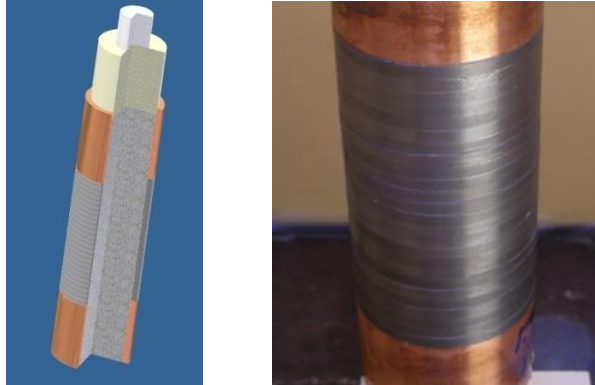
Aero 224 test article CAD drawing (left) showing rings, copper sleeves, and explosive assembly; actual test item (right) positioned inside catch tank
